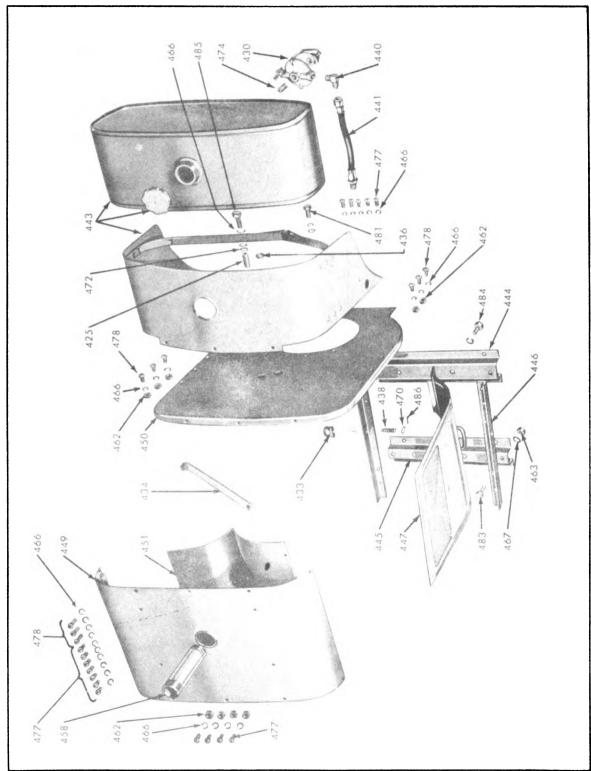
, ENGINE HOUSE WITH FUEL TANK AT TAKE-OFF END
